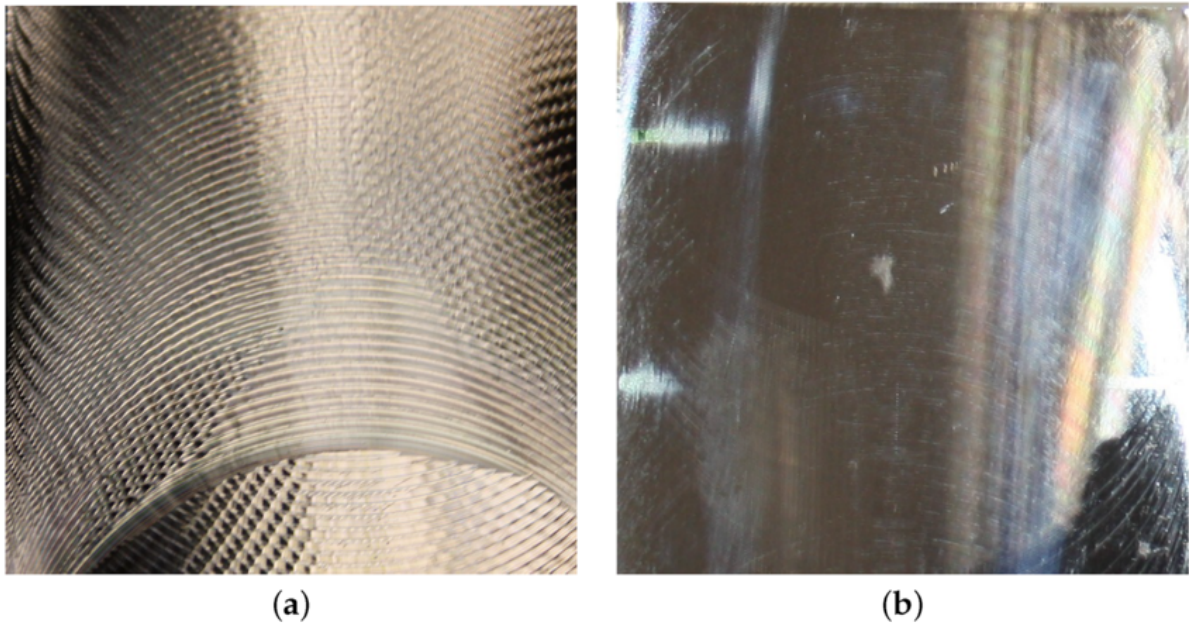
Workpiece surface finishing: (a) chatter; (b) no chatter.
